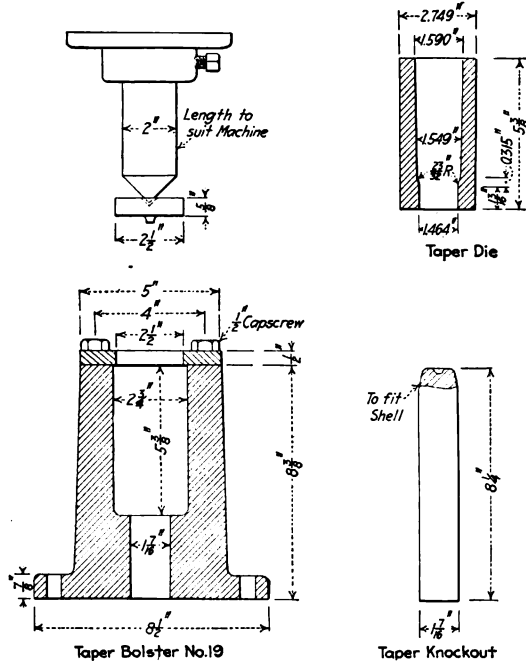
DETAILS OF PUNCH, BUNTER, DIE, BOLSTER AND KNOCK-OUT FOR TAPERING OPERATION
